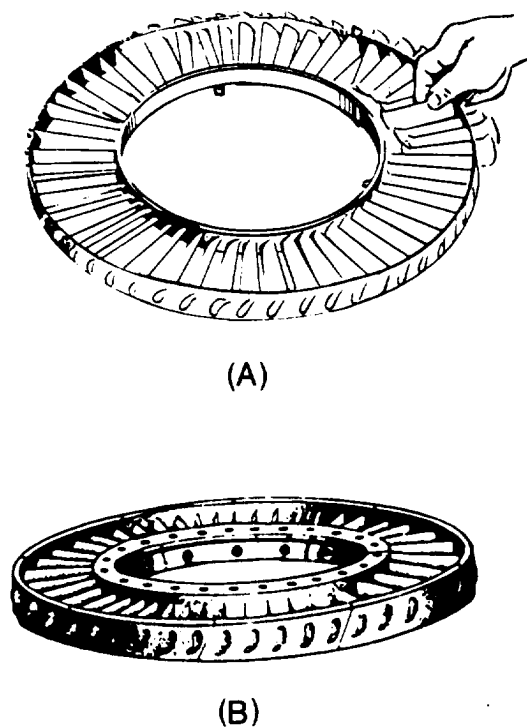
Turbine nozzle vane assembly. (A) With loose fitting vanes; (B) with welded vanes.
